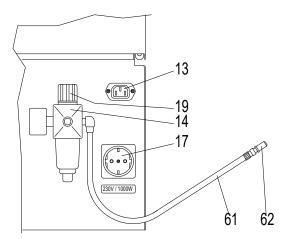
Device view from the front left (Warning: You have received a custom-made product.)
